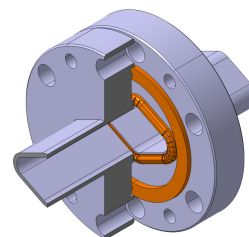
The CF40 flanged connection of rhomboidal chamber.
